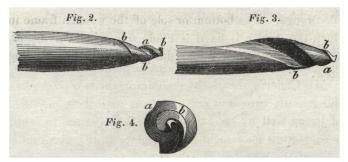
a front view of the bowl of the boring-bit; aa the cutting edge; bb a thread or fin winding round the back, which acts as a screw to draw the bit into the wood. Fig. 2 a back view, showing the thread bb. Fig. 3 a side view, and fig. 4 an end view.
